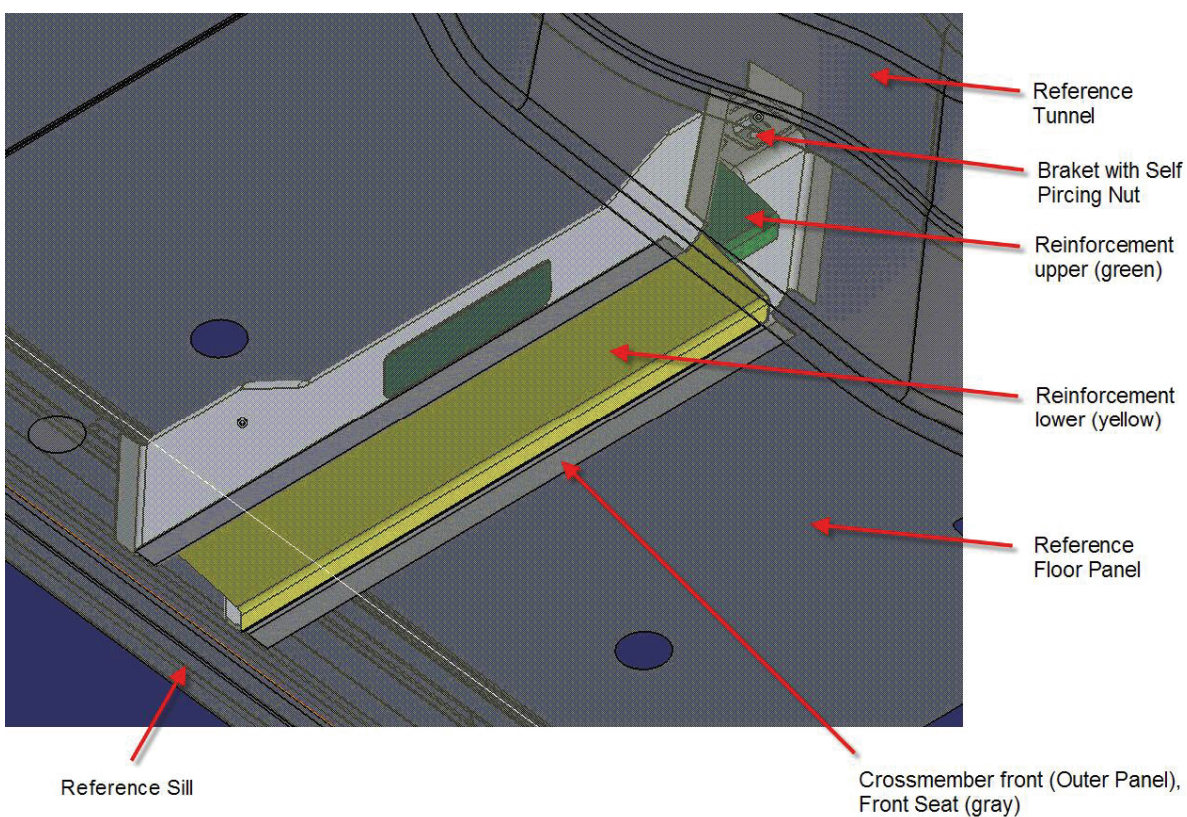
Assembly cross member front seat in context with mating BIW parts
